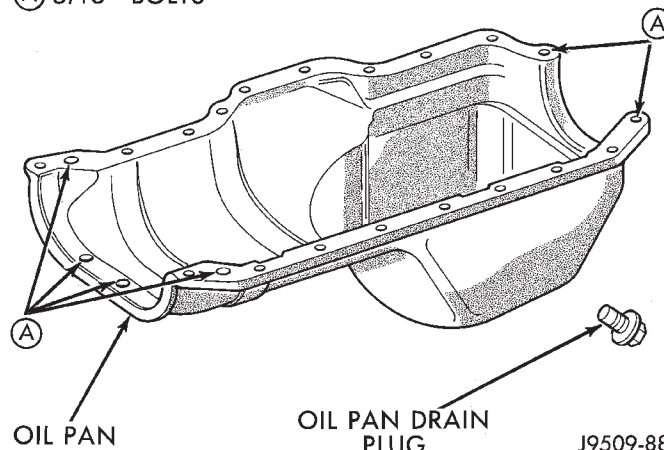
Position of 5/16 inch Oil Pan Bolts
